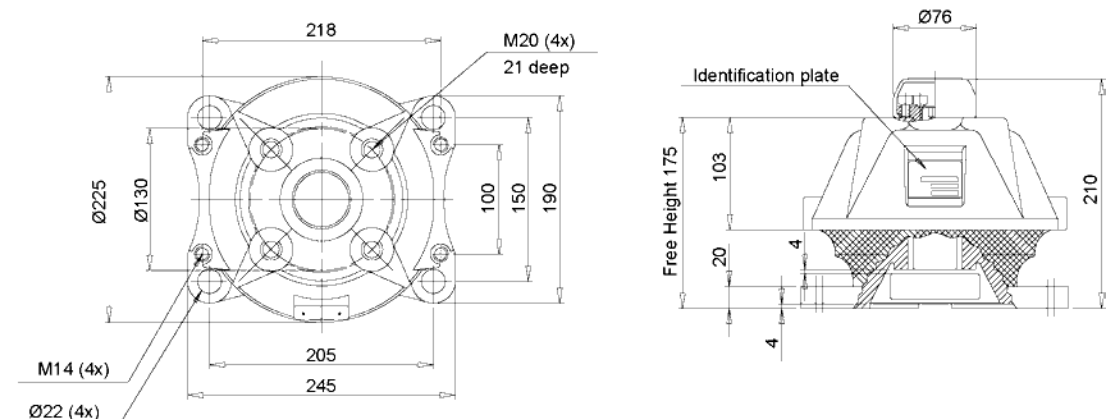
Rubber mount, In-line engines (DAAE004230C)
